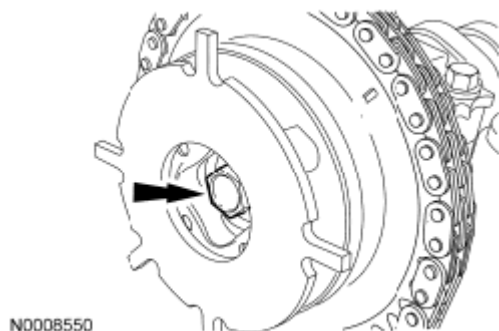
Locating Camshaft Phaser And Sprocket Bolt
